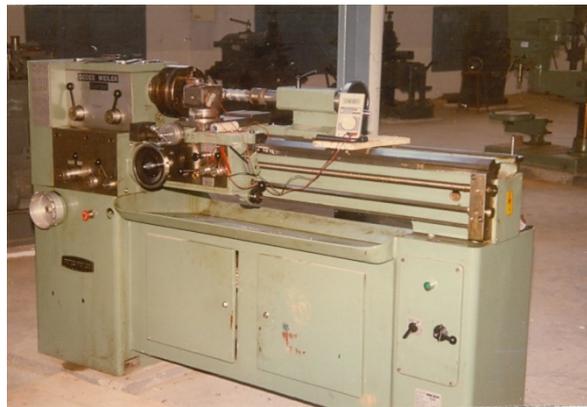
Photograph of experimental set up of Roller burnishing process on lathe.
